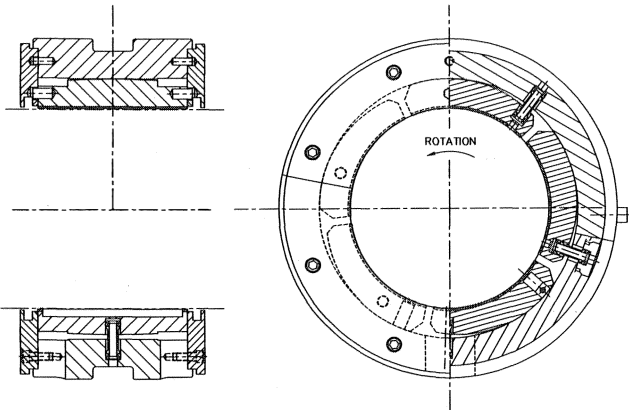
Leading Edge Groove Tilting Pad Journal Bearing.
